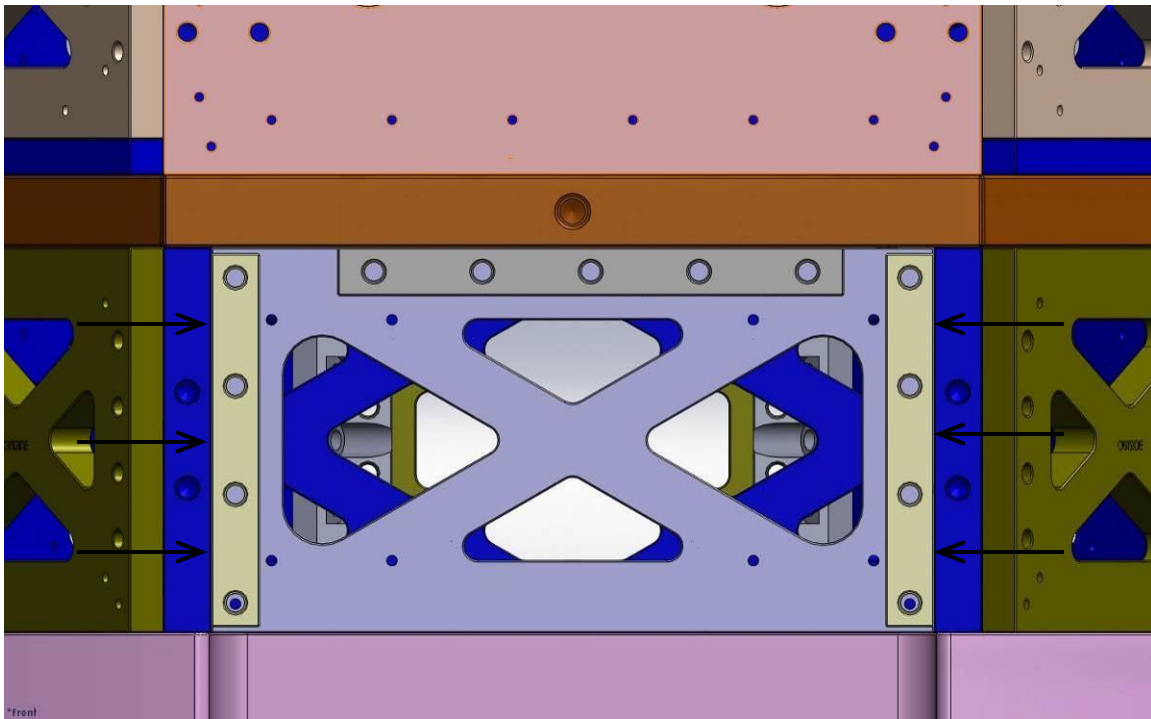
(2) D0901537 Brackets, Lower Outer Wall, Bottom Installation on D0901521 & D0901522 Radial Walls
